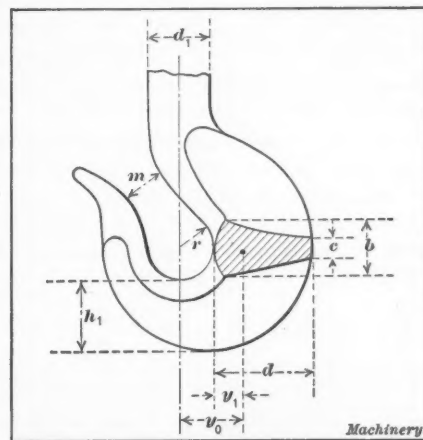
Diagram of Crane Hook showing Required Dimensions
